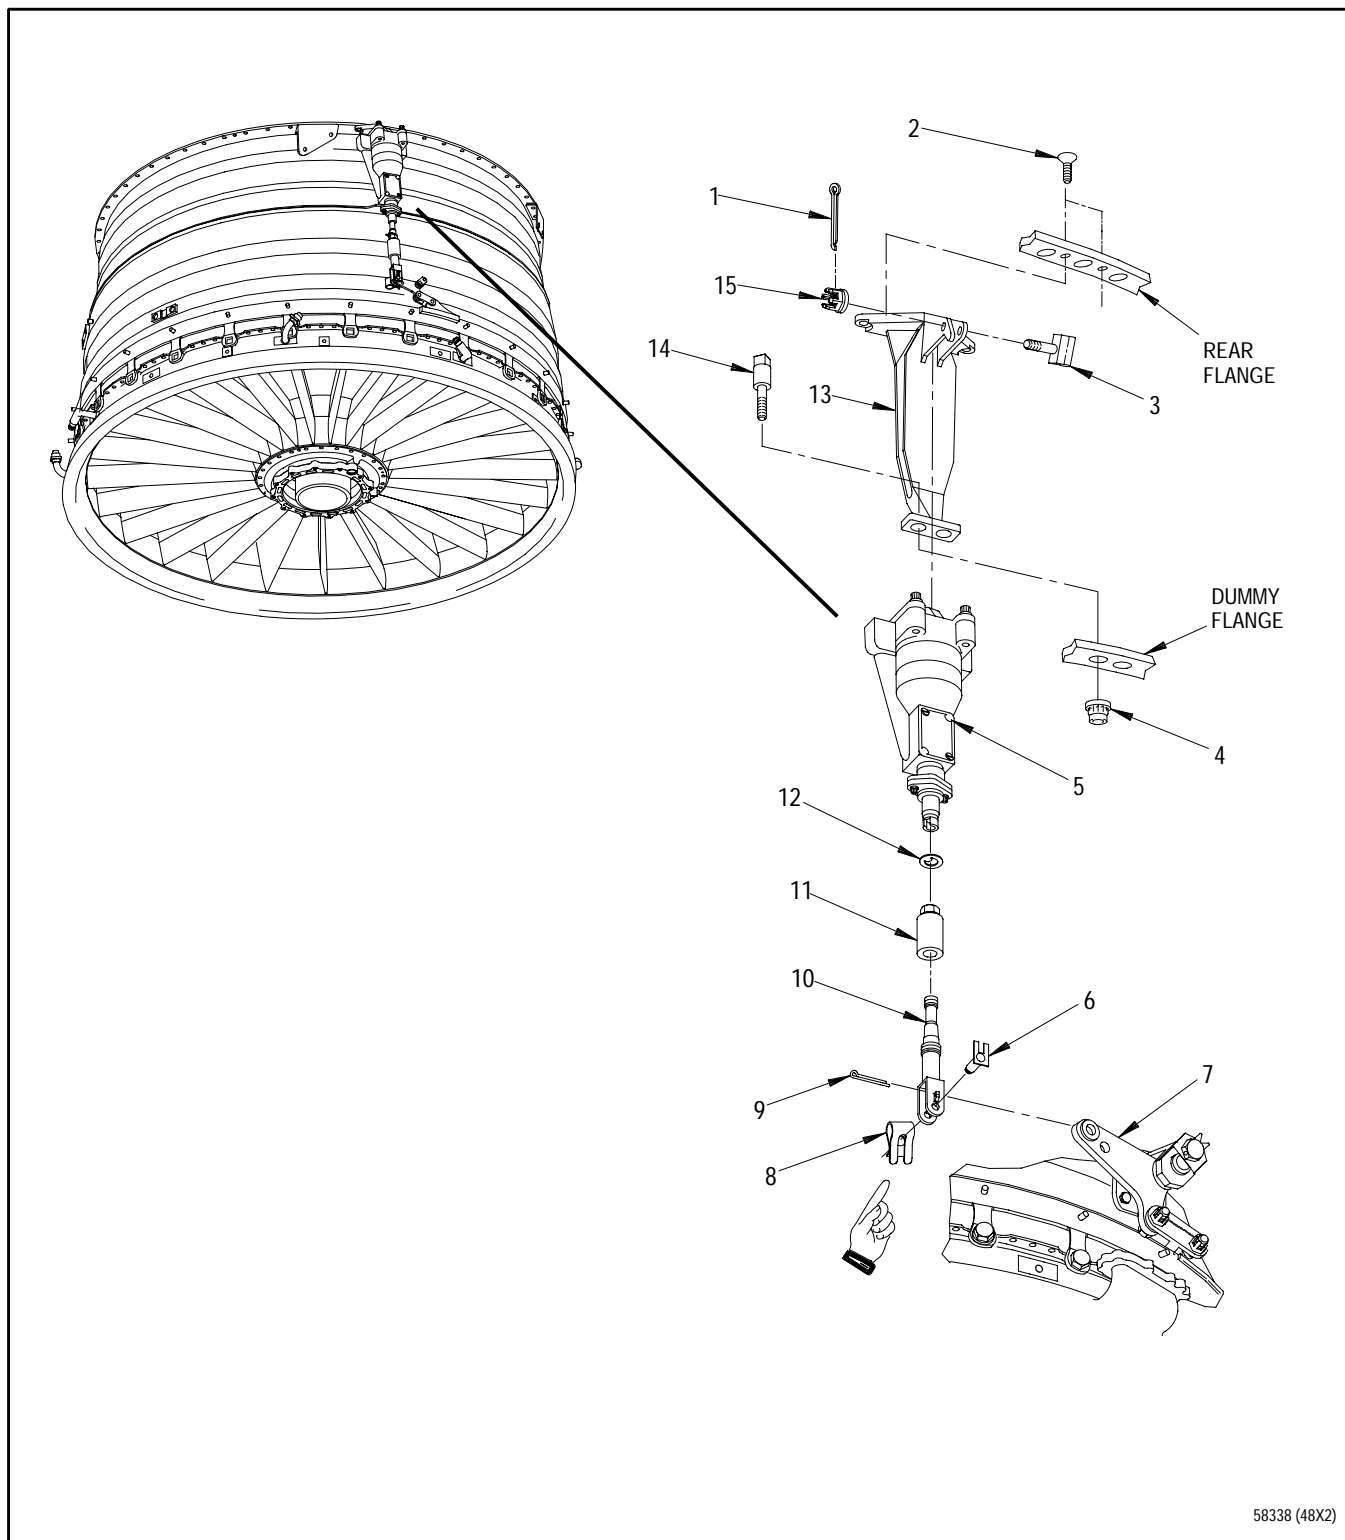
Compressor Inlet Variable Vane Linear Actuating Cylinder Attaching Parts - Installation
